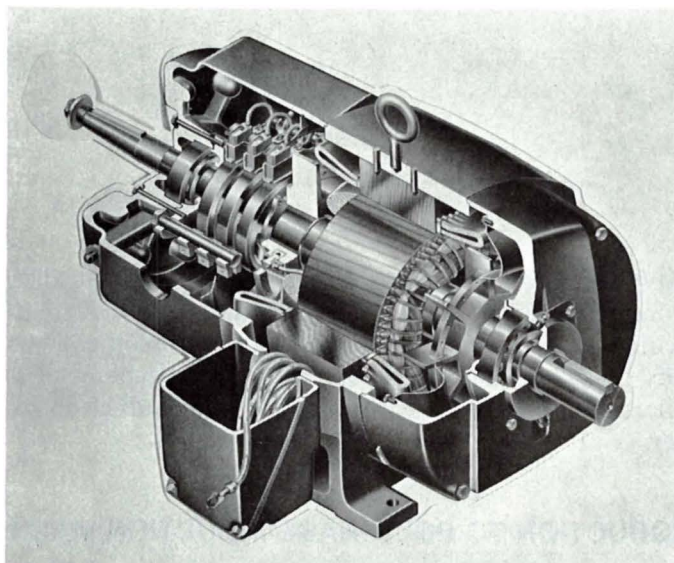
Cutaway view of a three-phase induction motor with a wound rotor and slip rings connected to the three-phase rotor winding. (General Electric Company.)
